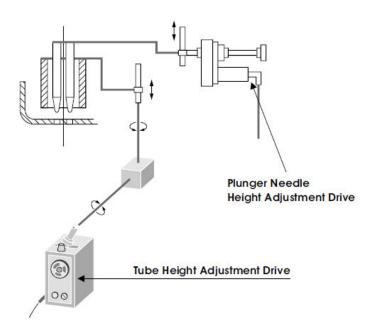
Mechanical feeder with tube and plunger height adjustment
